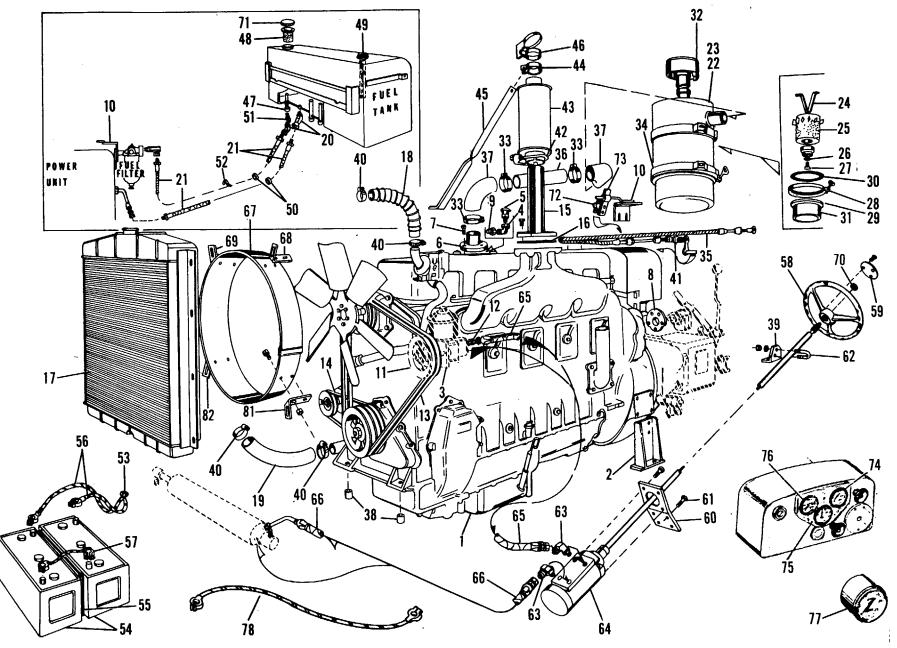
GENERAL MOTORS DIESEL POWER UNIT
